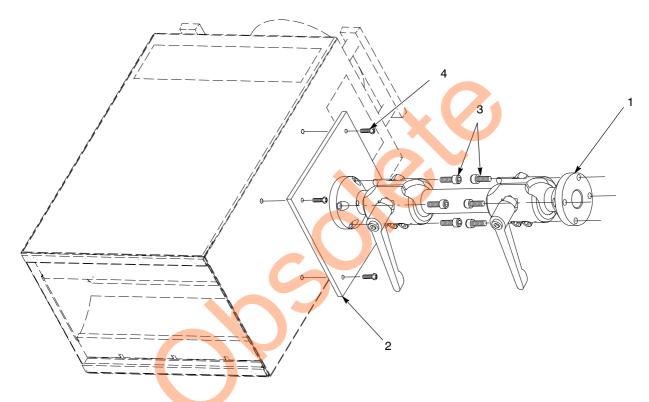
Optional Lamphead Mounting Bracket Kit
